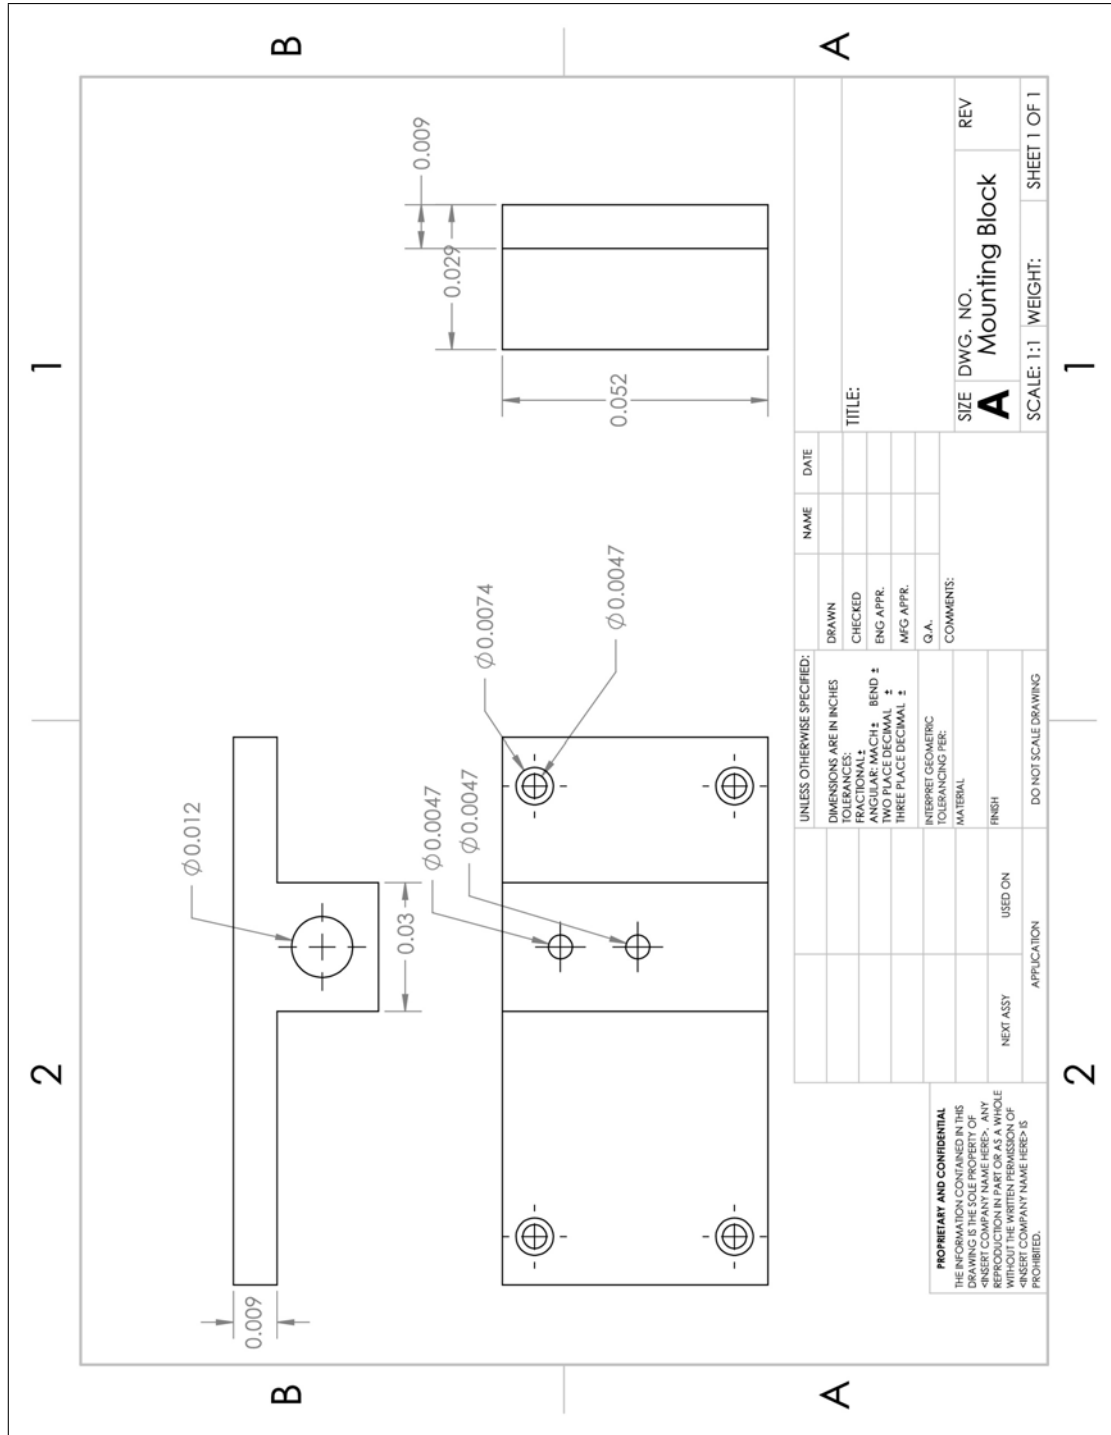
Drawing of Mounting Block for vertical rod and linear motor
